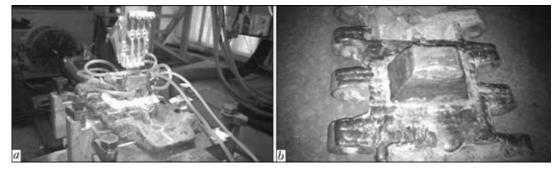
Electroslag cladding of track stud with two strips: a - cladding process; b - repaired track stud
